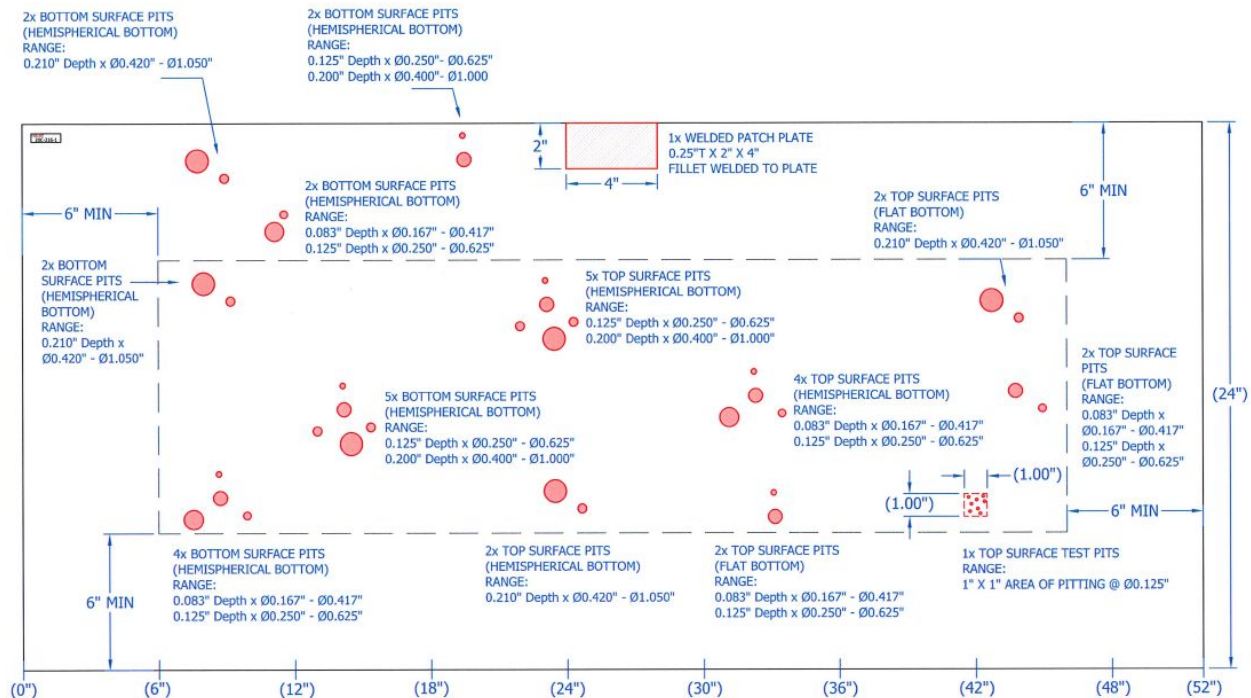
API-653 Test Plate Drawing (SRPN 02926)
